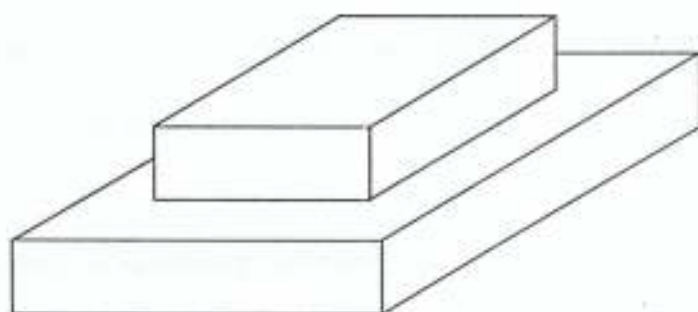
Final Refractory Assembly - Isometric View (x 0.25, Dimm: mm)
